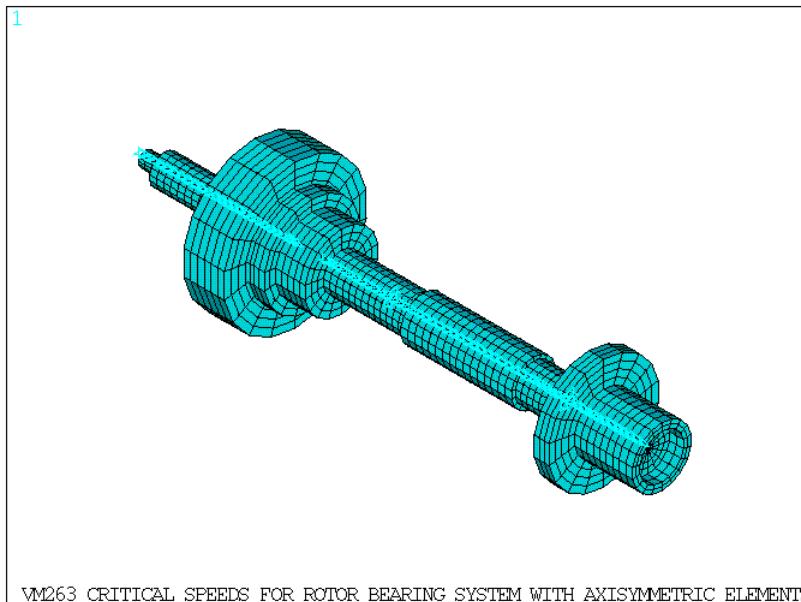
Isometric view of rotor-bearing system with/ESHAPe
